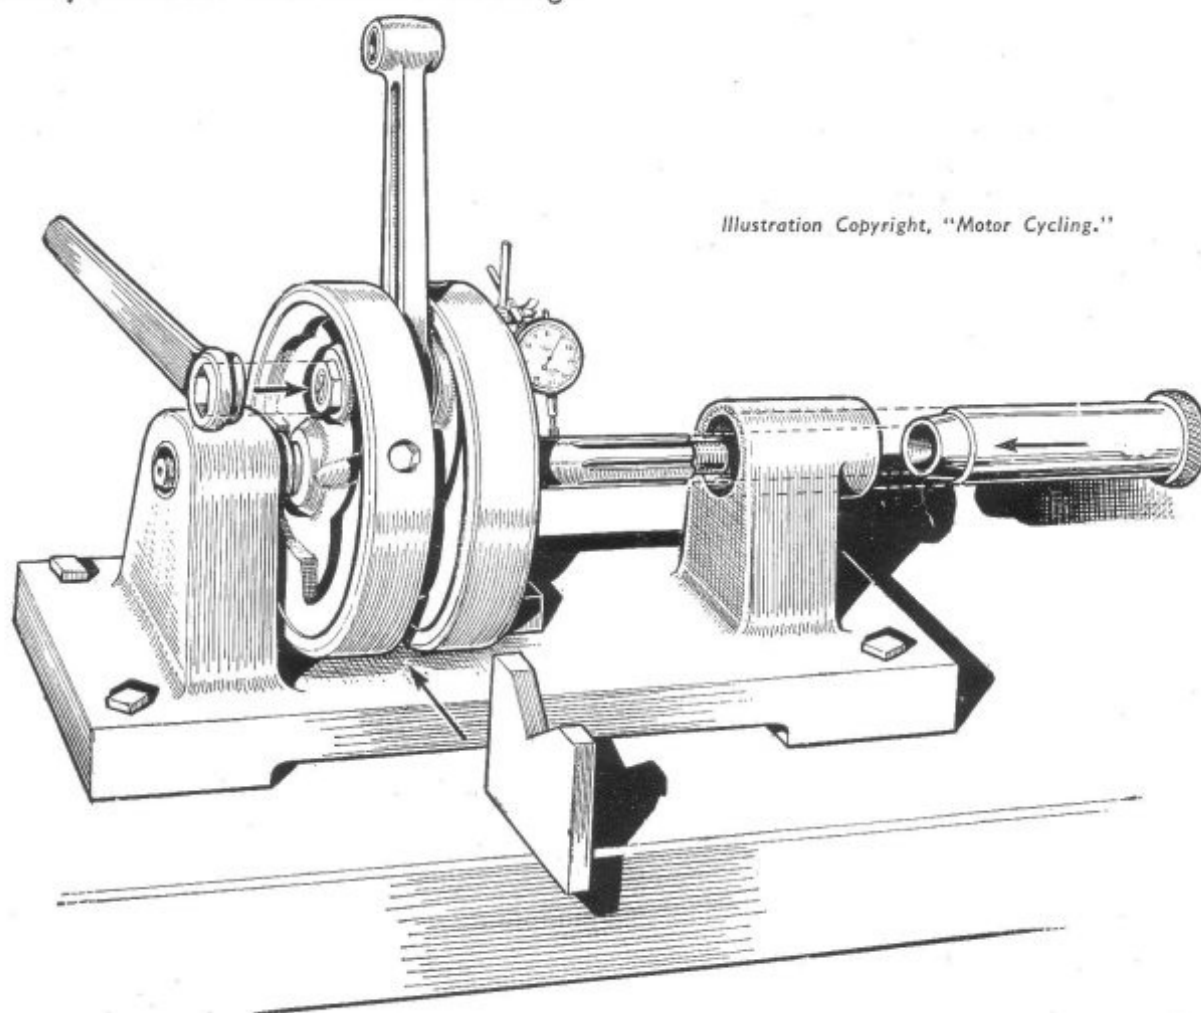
The special Flywheel Jig. The loose V block is placed under the big-end to prevent the flywheels rotating whilst the crankpin nuts are being tightened.
